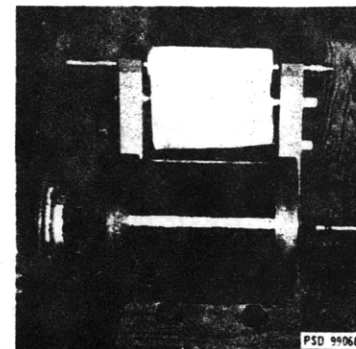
Complete Ring Assembly Prepared for Fiberglass Jacket
